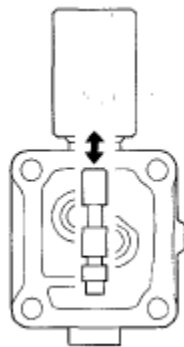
Checking A/T Clutch Pressure Control Solenoid Valve C
